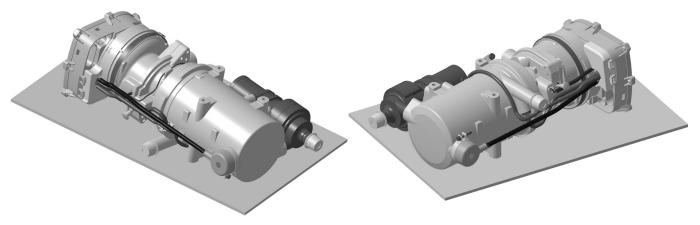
Preferred position of Thermo Pro 90 heater for storage and transport
